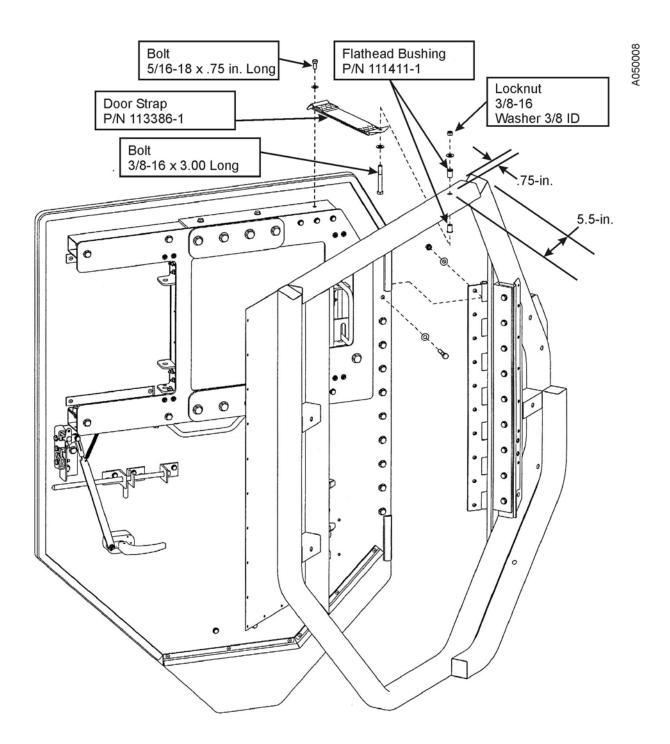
Locate the Strap Assembly attachment point and Install the Door Striker.
